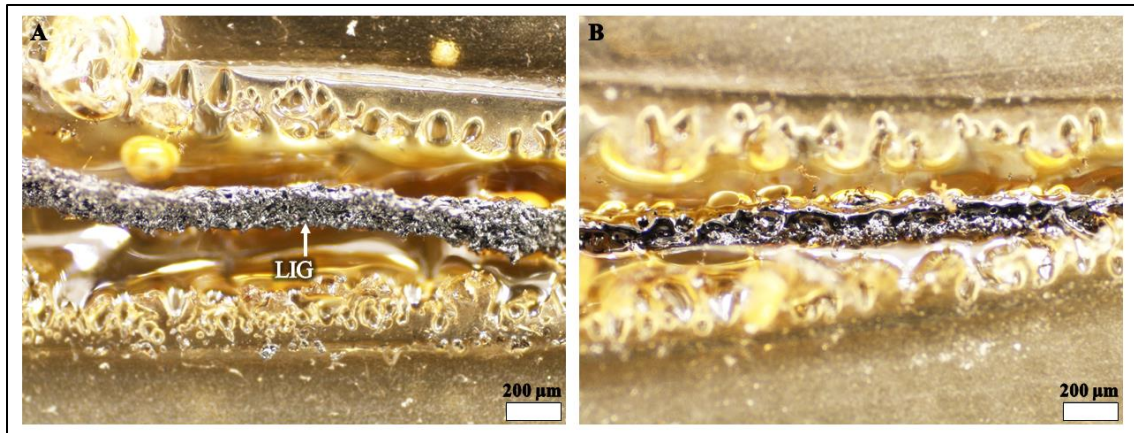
(A/B) Optical microscopy images (scale bar=200 μm) of LIG@PEI stripes after welding and lap shear testing. The structural integrity of LIG stripes is maintained throughout the welding process.
